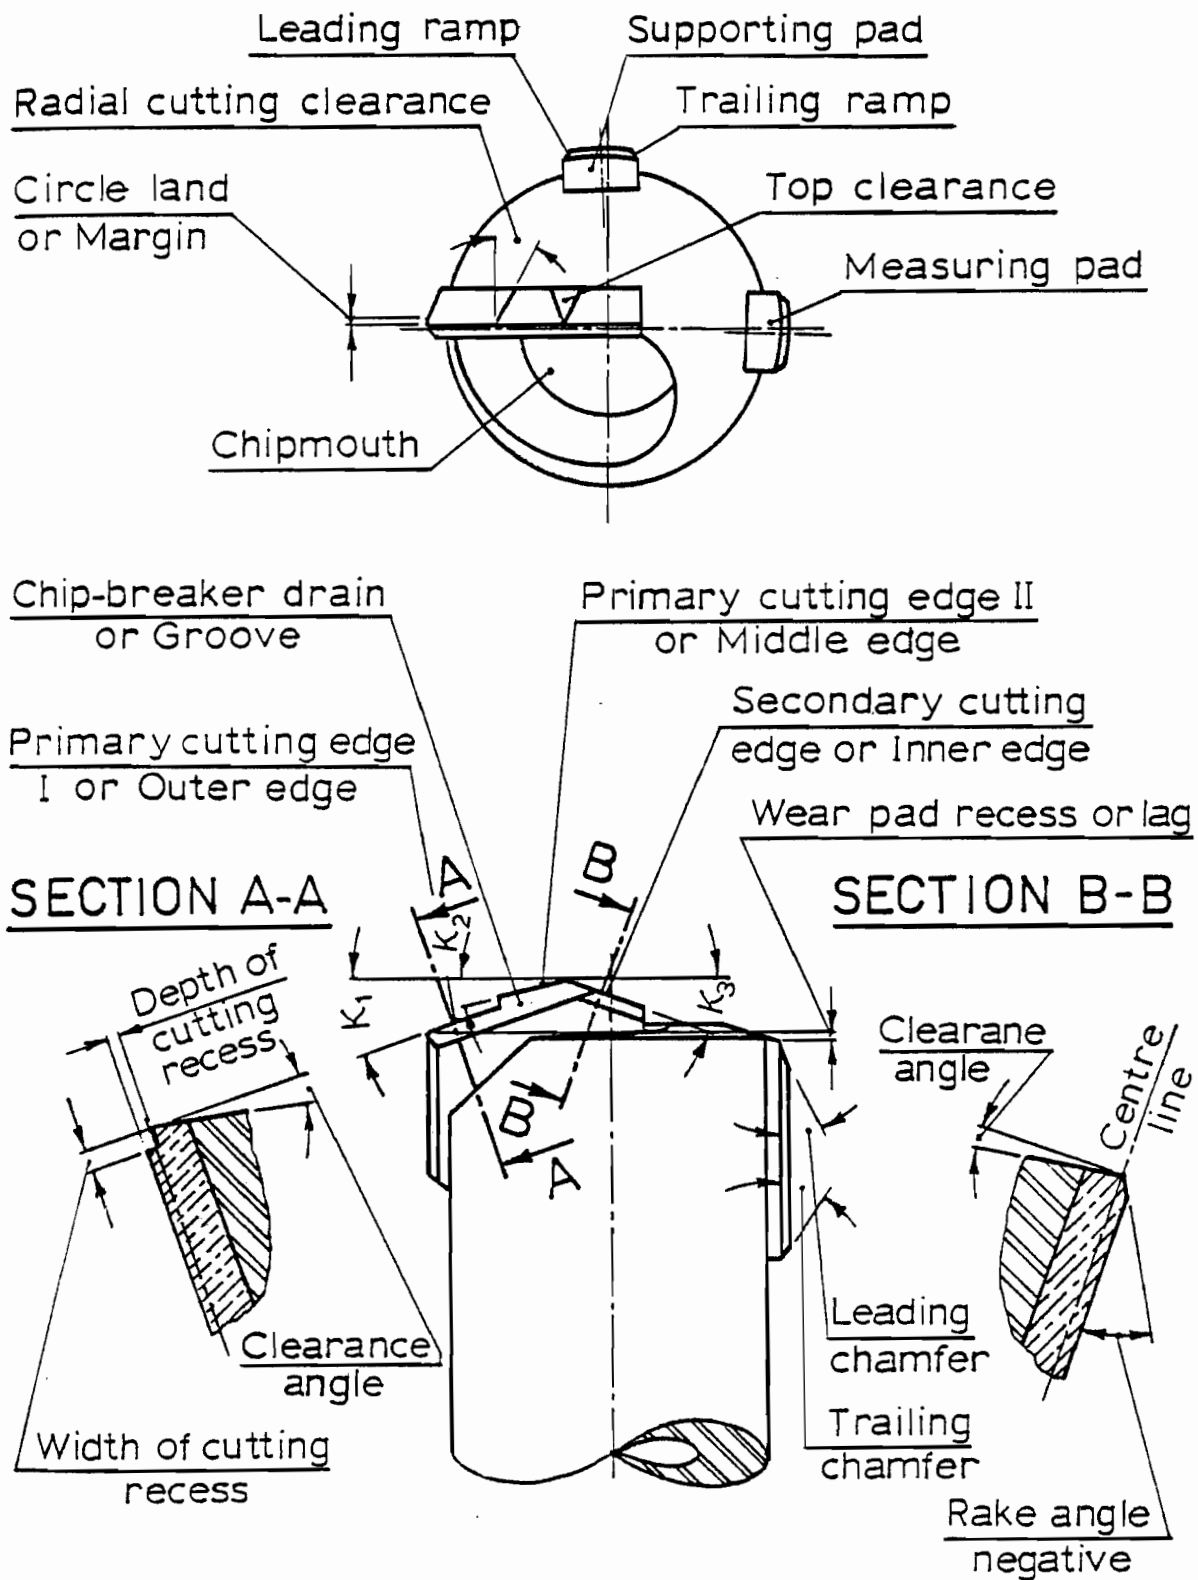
TOOL GEOMETRY OF A TYPICAL BTA SOLID BORING HEAD
